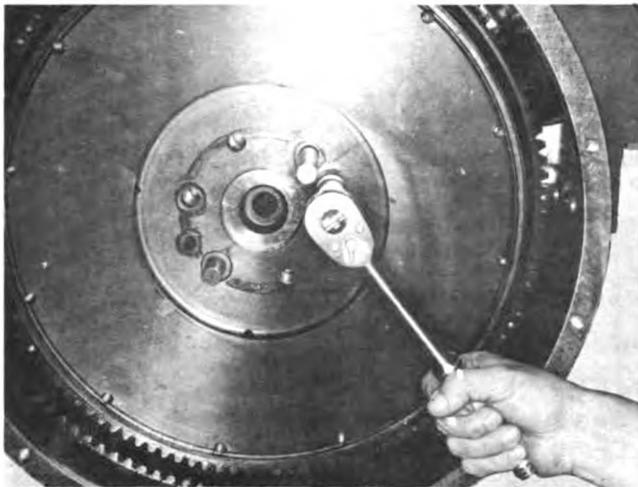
(N100113). Push The Flywheel From The Crankshaft.
